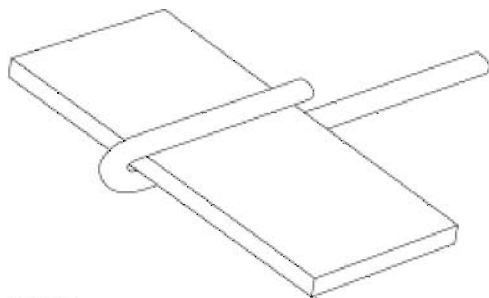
Fabricating Cleaning Tool From 1/8-in Diameter Brazing Rod
